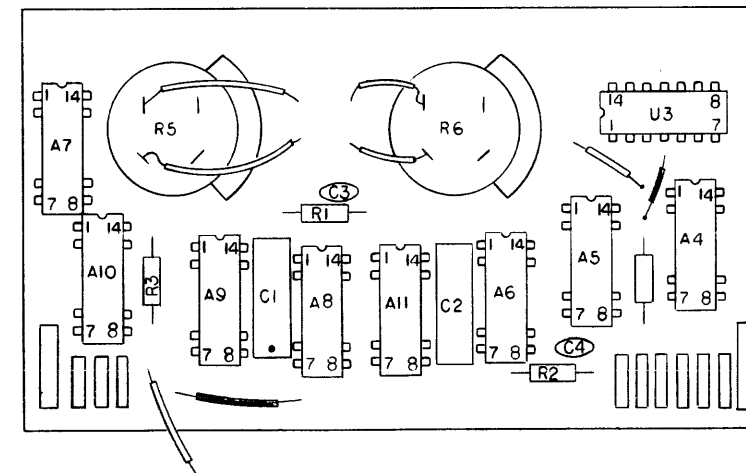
A18 IEEE-488-1975 Switch PCB Assembly, -15 Option
